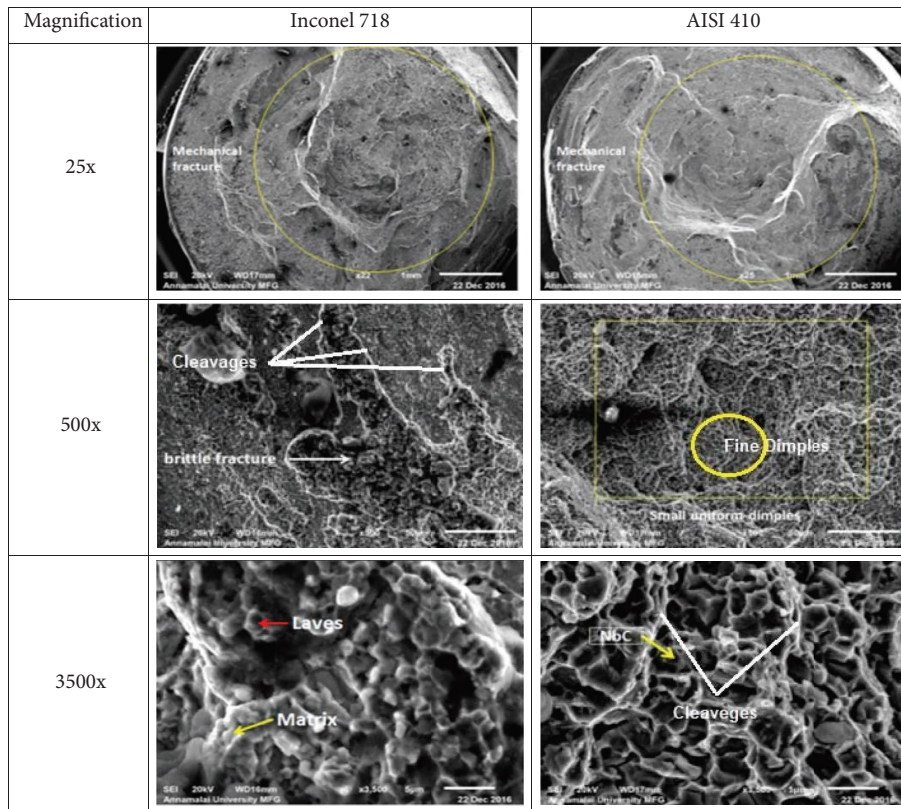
Fractography of tensile-tested samples of dissimilar friction welded joints.
